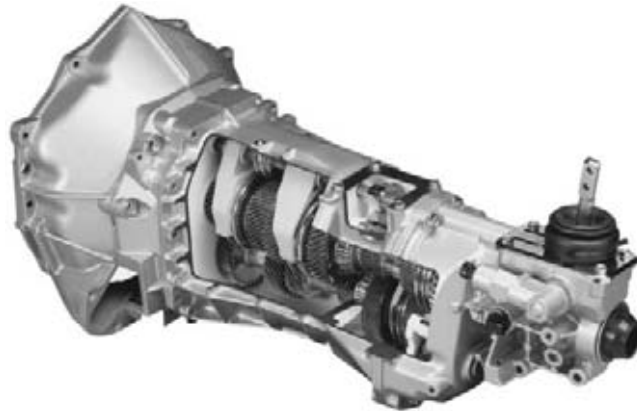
A T56, six-speed transmission. First through fourth gears are in the main case; fifth, sixth, and reverse gears are located in the extension housing. (Courtesy of Transmission Technologies Corporation, TTC)
